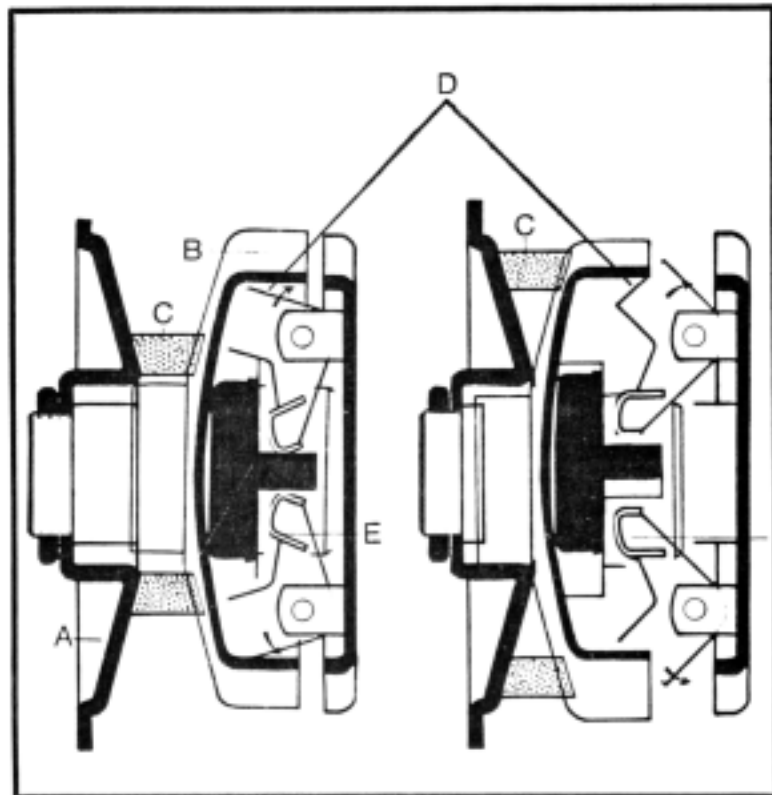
Peugeot speed-sensitive pulley. A-fixed pulley flange; B-movable flange; C-drive belt; D-flyweights
